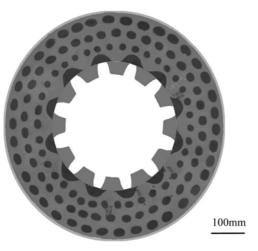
Picture of X-ray inspection of disk brake made by an adjustable pressure casting method.
